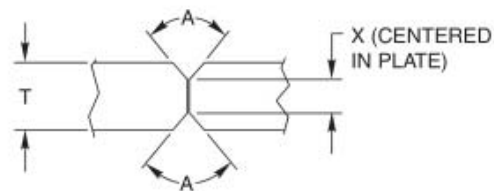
Multiple-Pass Groove Weld Test Assembly
